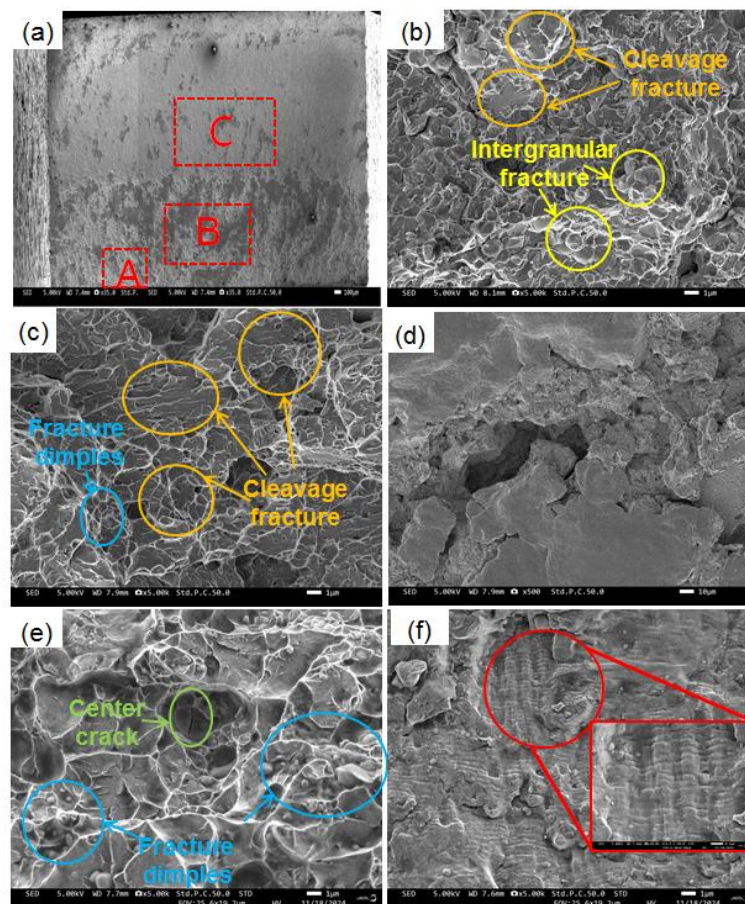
Fracture morphology of samples at the quenching temperature of 1020 °C with 406 MPa ($N_f = 3.86 \times 10^4$): (a) macroscopic morphology; (b) the carburized layer; (c) –(d) the transition layer; (e) the core; (e) fatigue striations.
